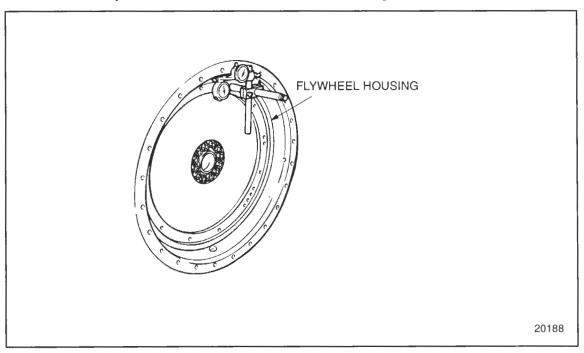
Measuring Flywheel Housing Bore Concentricity and Bolting Flange Runout
